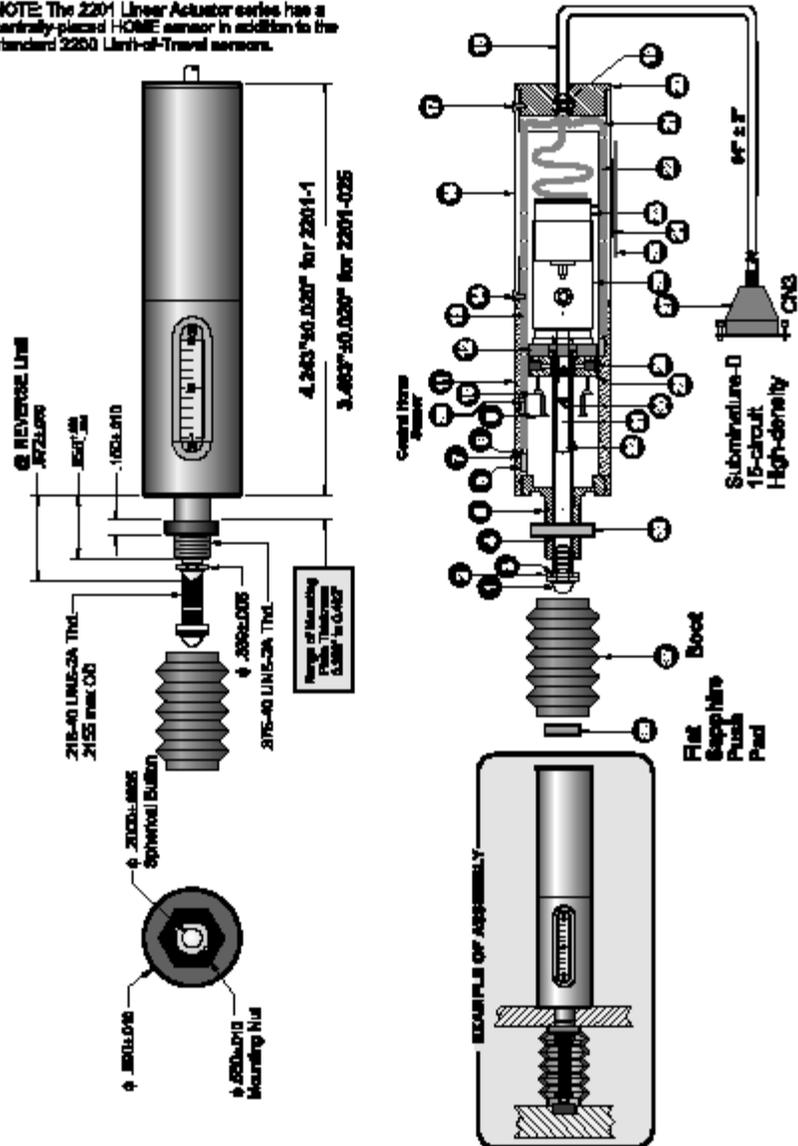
Diamond Products' proposed actuator. It consists primarily of a micrometer screw driven through a high-ratio gear reducer. A better version of this illustration is in Appendix B.
